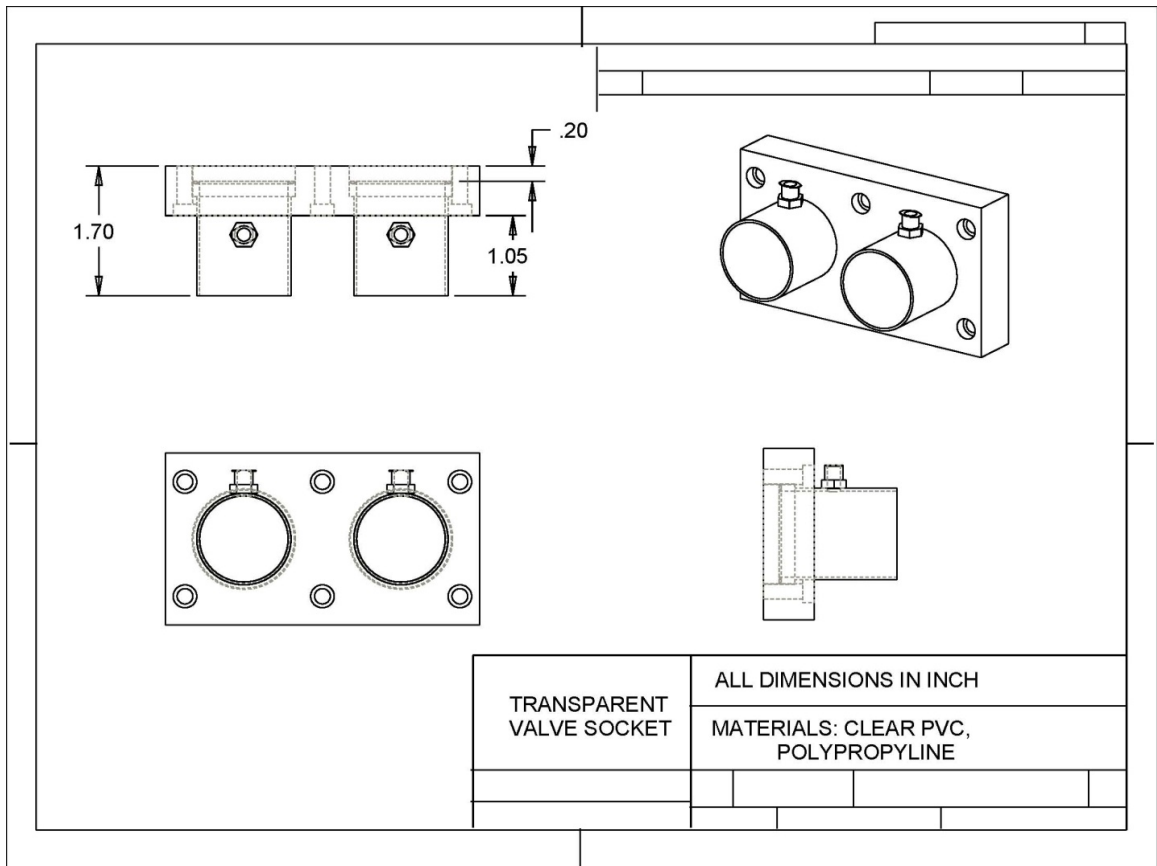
2D CAD model of the transparent valve socket with detailed dimensions. Figures are presented as the top, front, right hand and isometric views.
